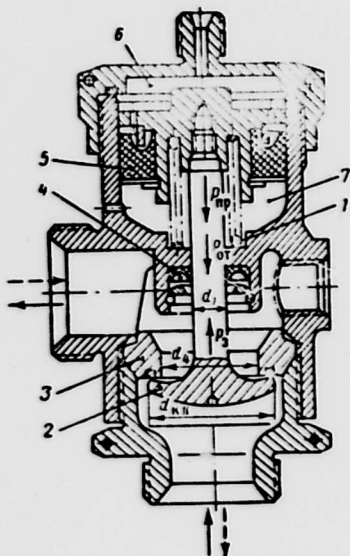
Valve with a servomotor: 1 - spring; 2 - valve; 3 - valve seat; 4 - packing; 5 - packing of the servopiston; 6, 7 - servomotor cavities.
